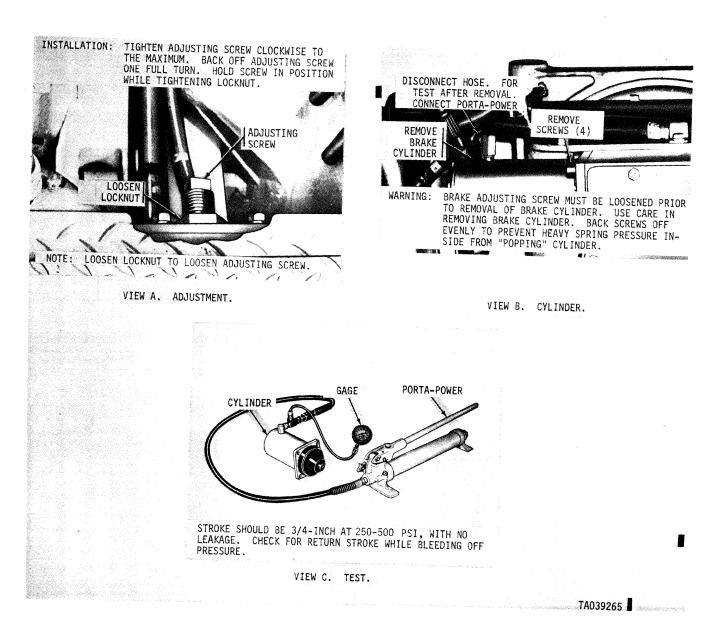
Winch brake cylinder—removal test, installation and adjustment.
